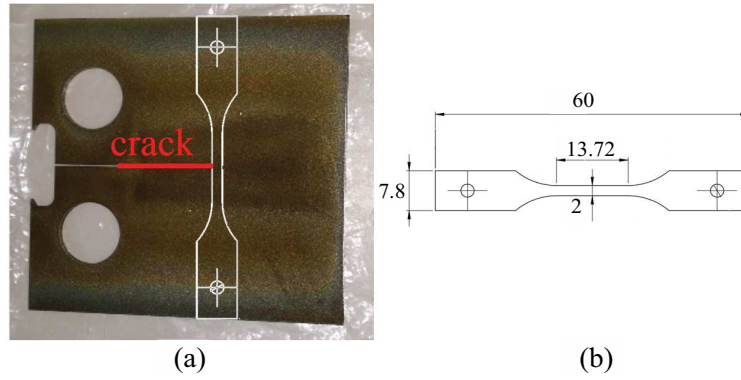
Preliminary machining of pre-cracked CT sample (a) before performing the final EDM of the SENT (b).
